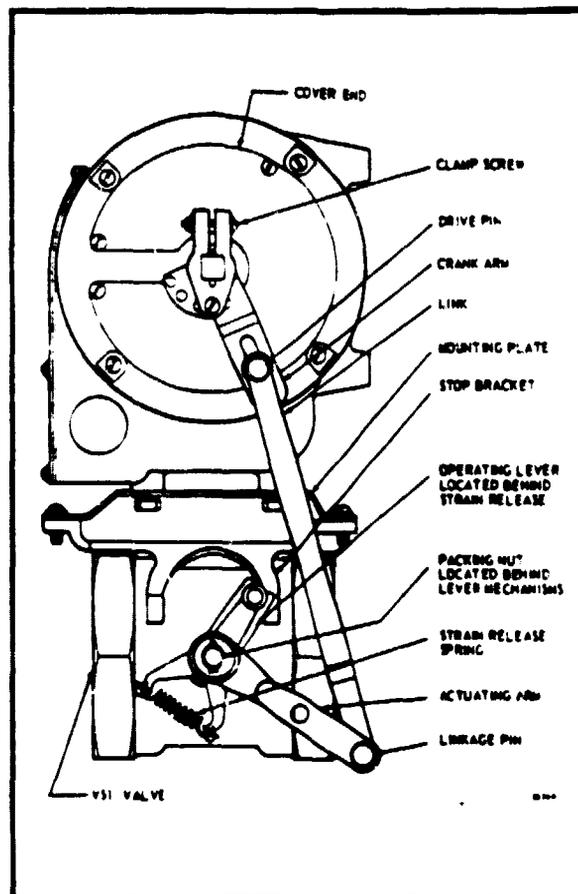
TYPICAL COMBINATION OF VS1E, ACTIONATOR MOTOR, AND Q100C LINKAGE ASSEMBLY.
